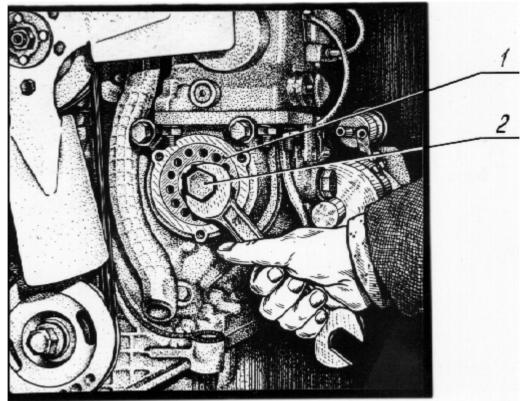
Setting the splint into the hole of the rear sheet and flywheel.
